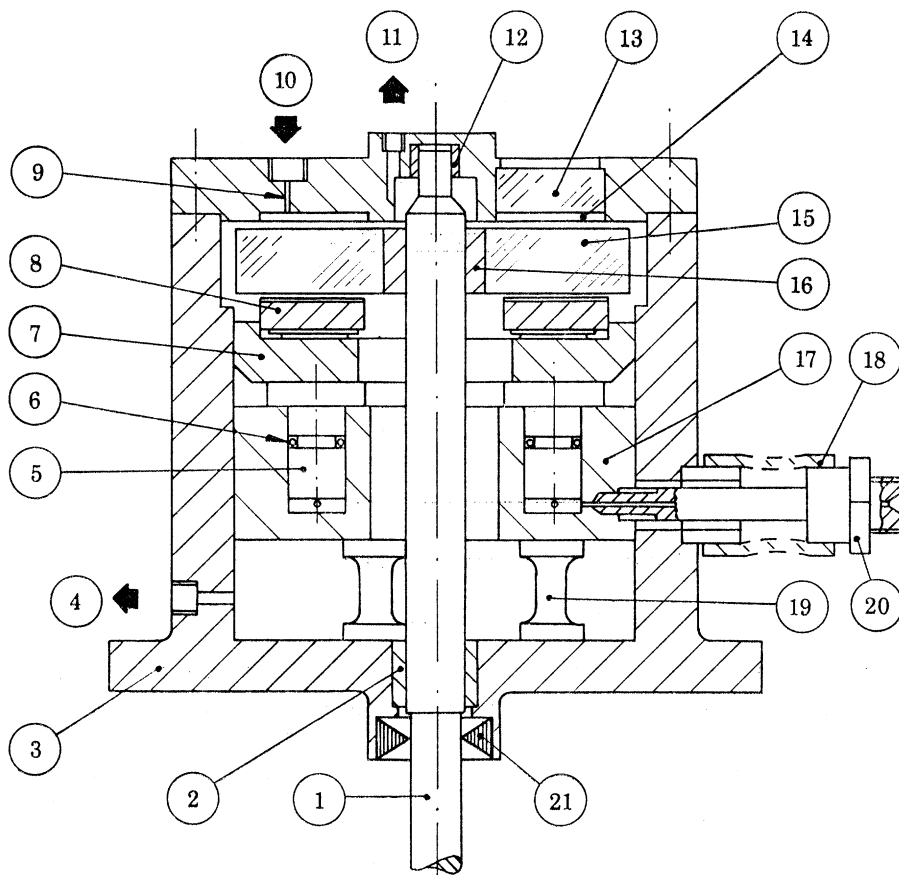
Section of test head. 1, Shaft; 2, PTFE bush; 3, bearing housing; 4, oil outlet; 5, loading piston; 6, 'O' ring seal; 7, bearing carrier ring; 8, thrust pad; 9, capillary restrictor; 10, oil inlet; 11, oil outlet; 12, PTFE bush; 13, glass window; 14, hydrostatic bearing recess; 15, glass thrust collar; 16, rubber bush; 17, monobloc loading cylinder assembly; 18, flexible tubing; 19, strain gauge load cell; 20, pressure inlet for loading device; 21, oil seal.
